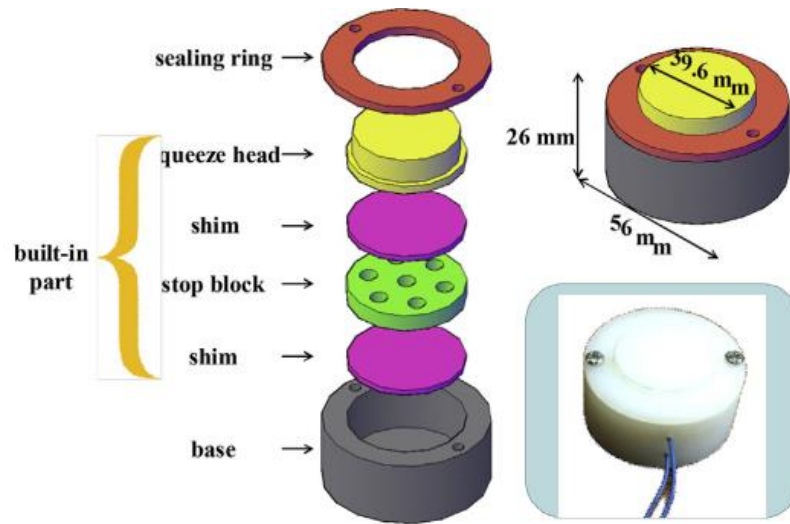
Exploded view of a single piezoelectric transducer [16]
